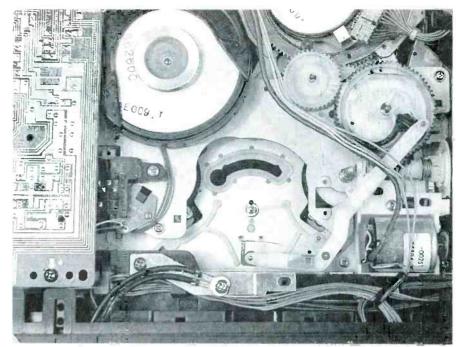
A TYPICAL LOAD MOTOR is located on the bottom side of the VCR's chassis.
